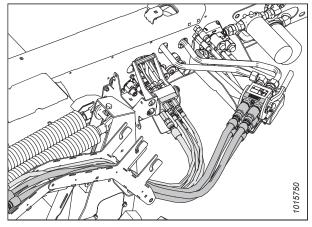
Hydraulic Multicouplers and Hose Routing
